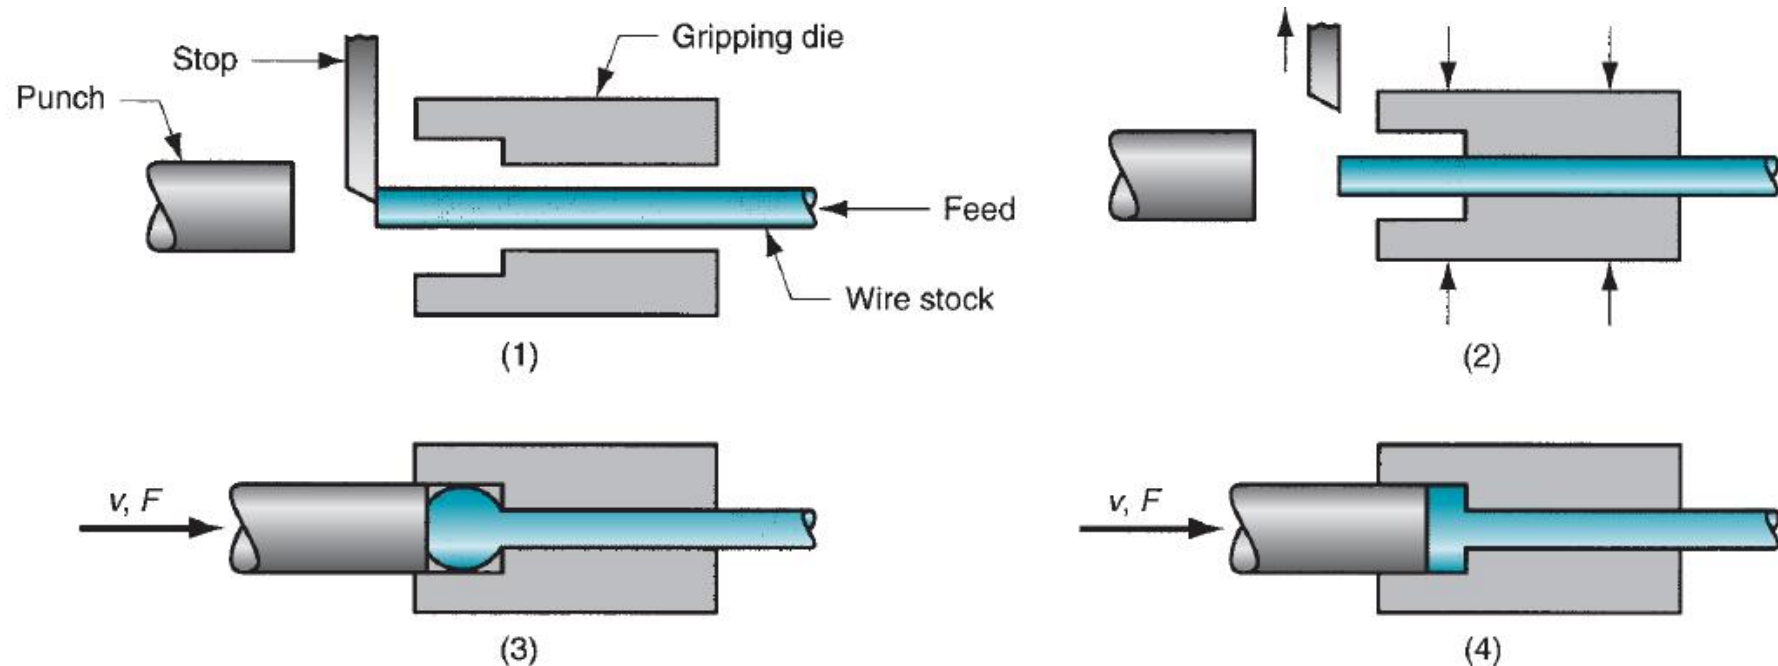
An upset forging operation to form a head on a bolt. (1) wire stock is fed to the stop; (2) gripping dies close on the stock and the stop is retracted; (3) punch moves forward; and (4) bottoms to form the head.
